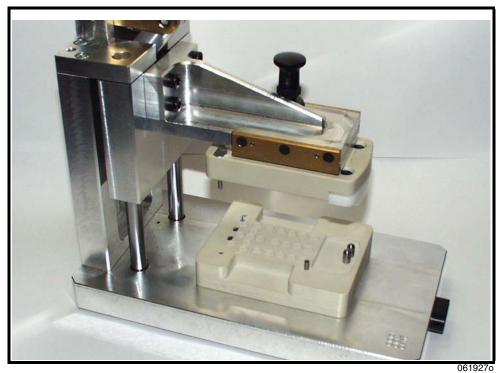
K1 EL and Acoustic Gasket Alignment and Press Tool
